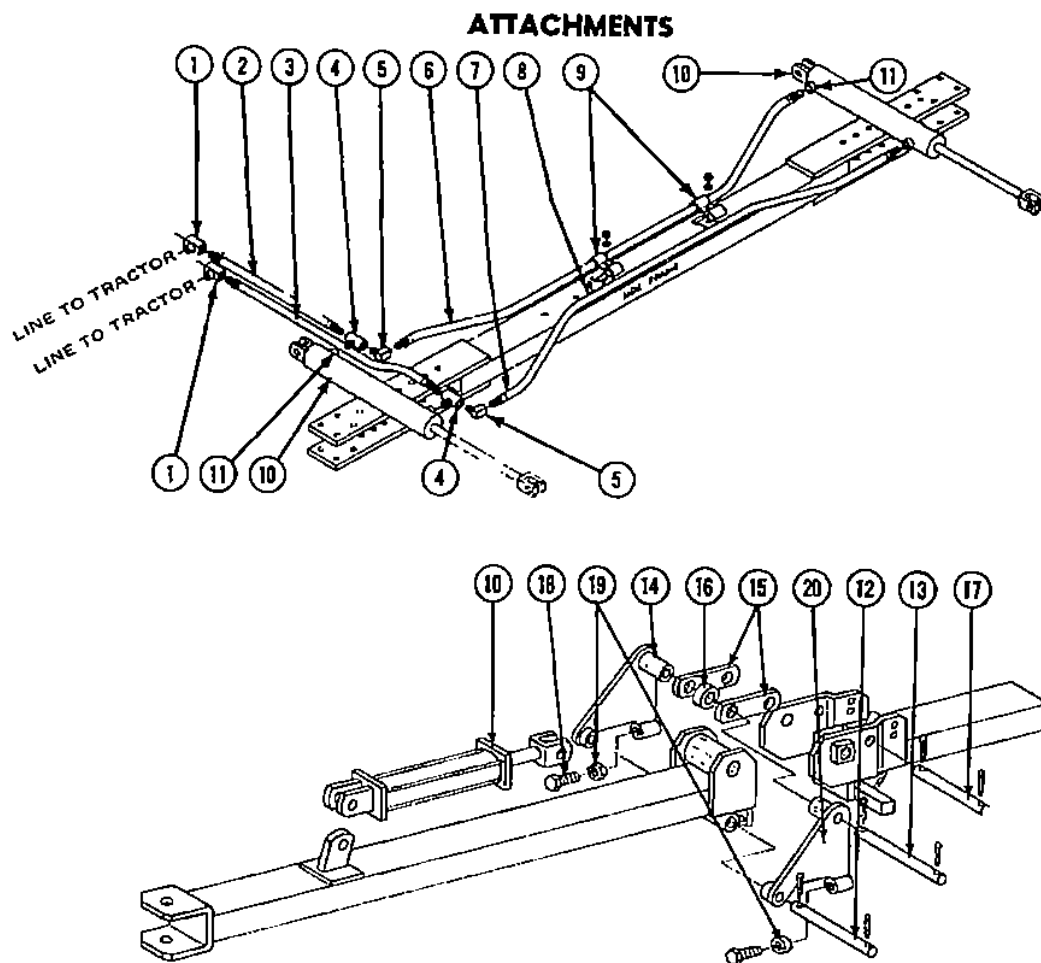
HYDRAULIC FOLDING ATTACHMENT (COMPLETE)
